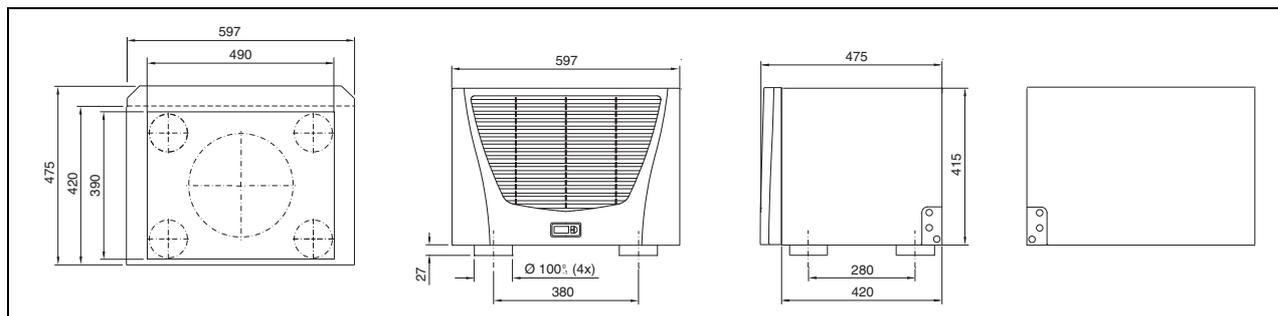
SK 3209.XXX/SK 3210.XXX assembly
